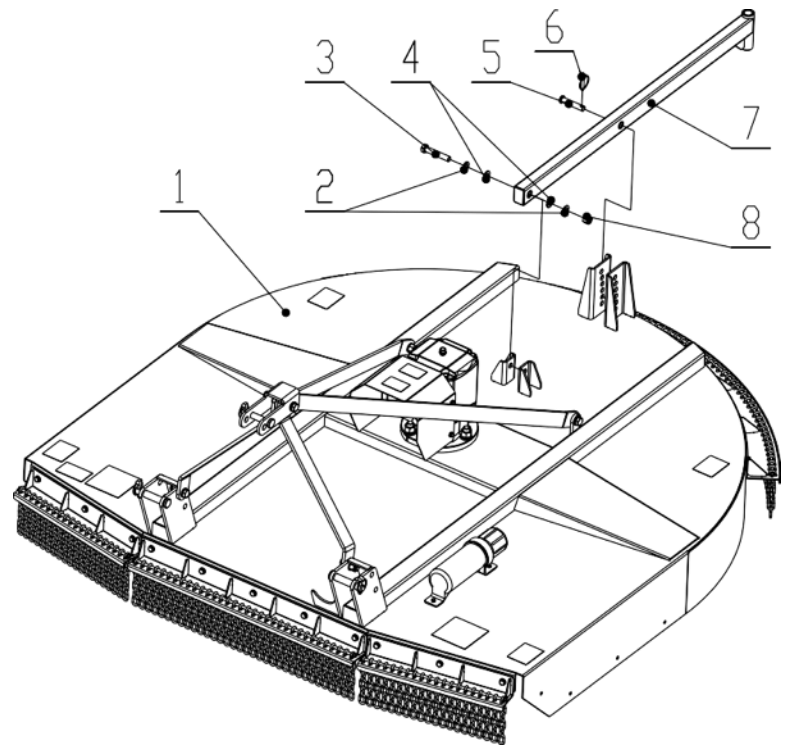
Installing R&L Skid Weldment and Fittings
